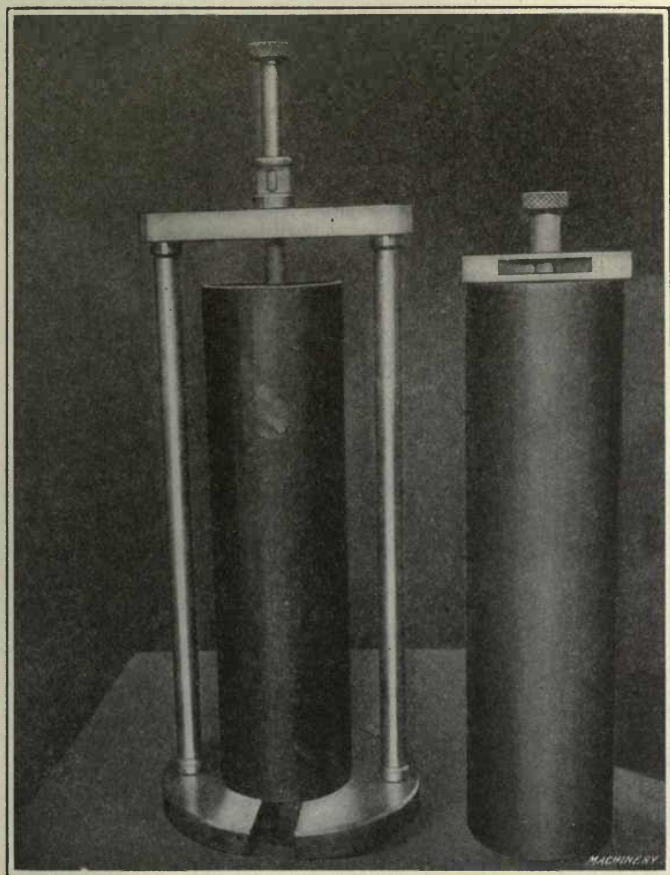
Gaging Total Length of Trimmed Forging Prior to Turning
